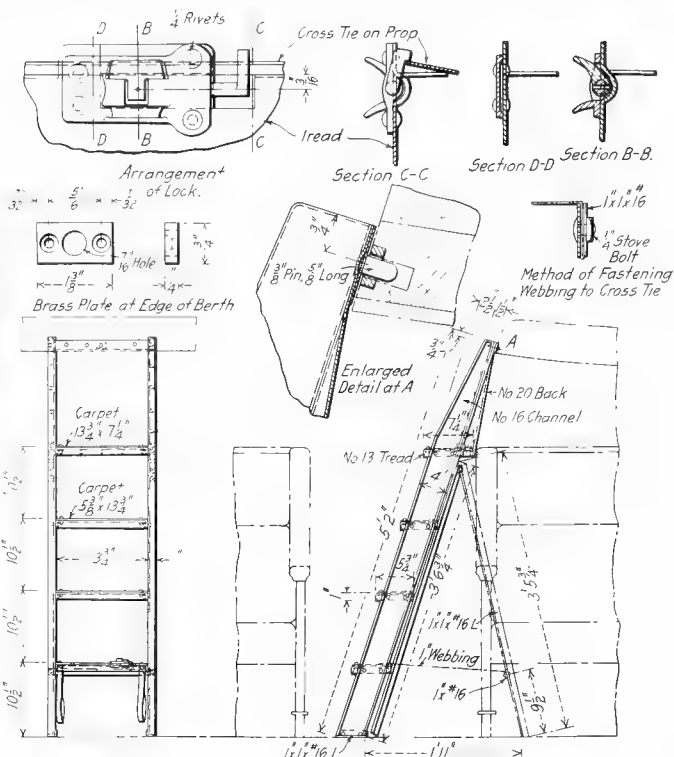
Steel Step Ladder for Sleeping Cars. Canadian Northern.
